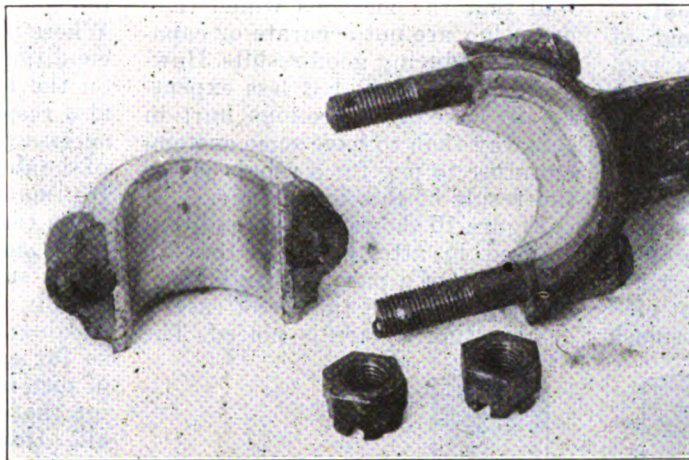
AN EXAMPLE OF THE PLAIN CONNECTING ROD BEARING, IN WHICH THE BEARING PROPER IS AN INTEGRAL PART OF THE ROD
